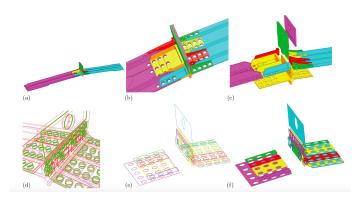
Aircraft part for assembling the wings with the body of an aircraft (model courtesy of EADS). (a,b) two views of the components, (c) exploded view, (d) ray casting results, (e) boundary reconstruction, (f) nal interfaces
